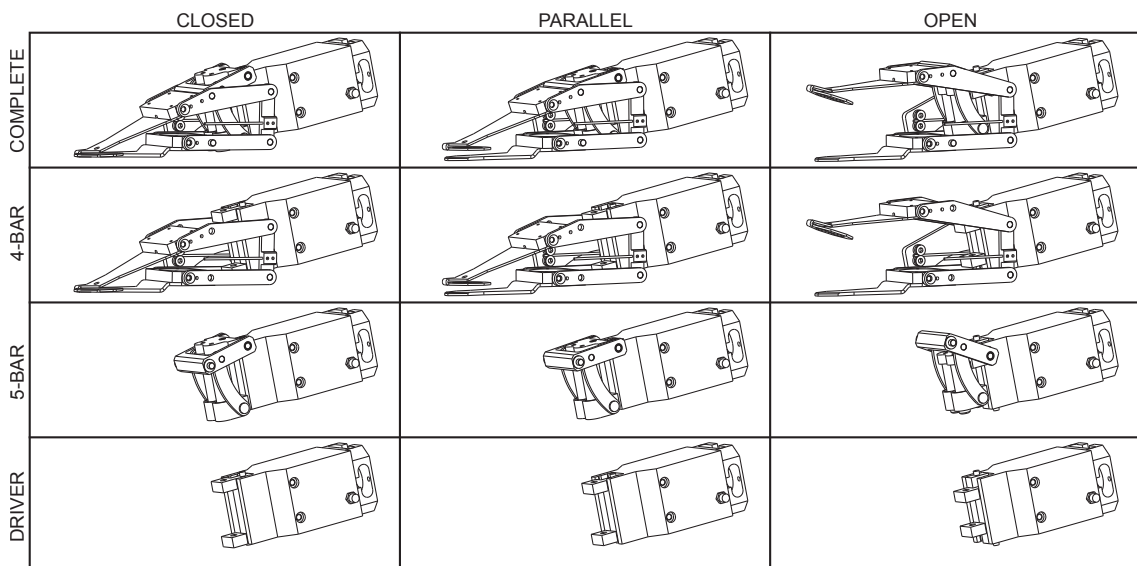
From bottom to top, axonometric views of: driver; driver with the 5-bar assembled; driver with the 4-bar (5-bar not shown); complete gripper (driver, 5-bar, 4-bar). The mounting plates are removed to see the mechanisms. The 4-bar is in neutral configuration; the 5-bar is in open, parallel and closed configuration
